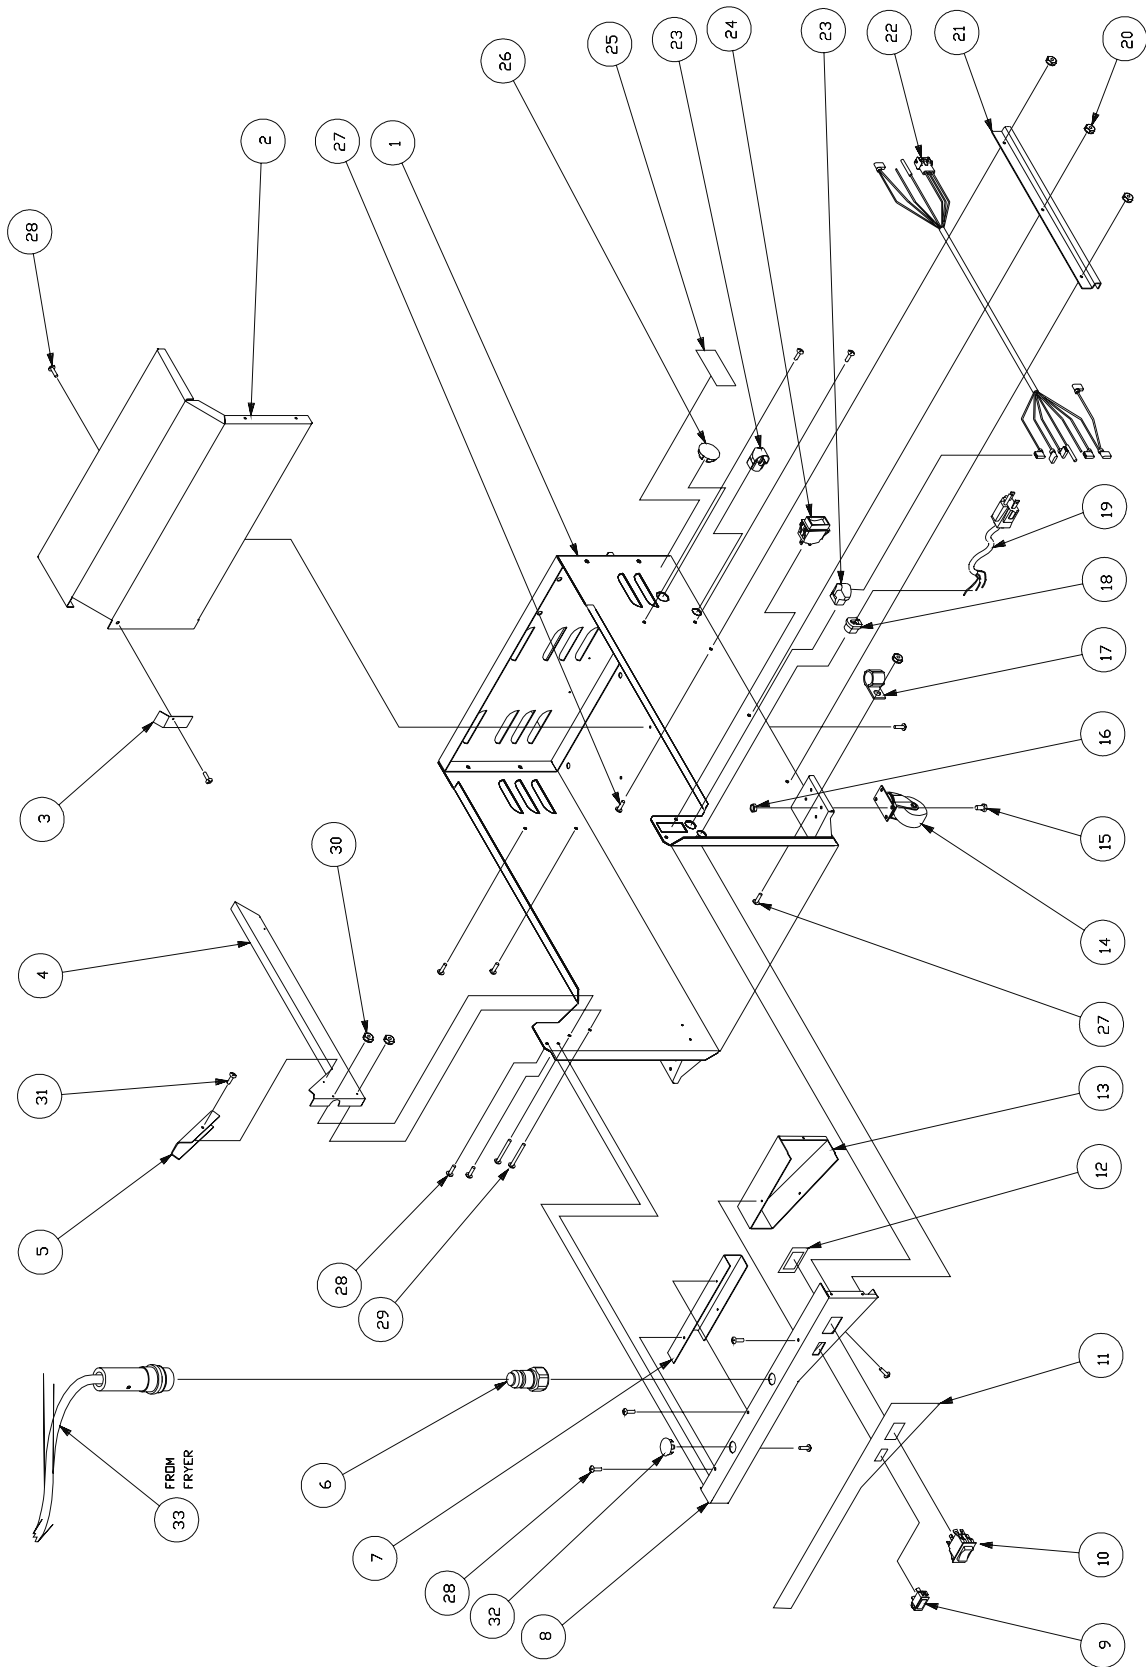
UFM Filter, Frame/Electrical Assembly
